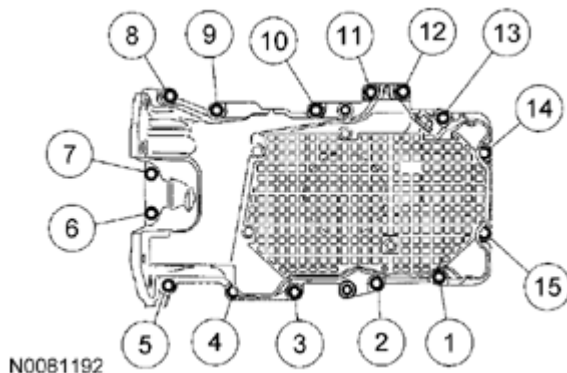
Identifying Oil Pan-To-Engine Bolts Tightening Sequence
